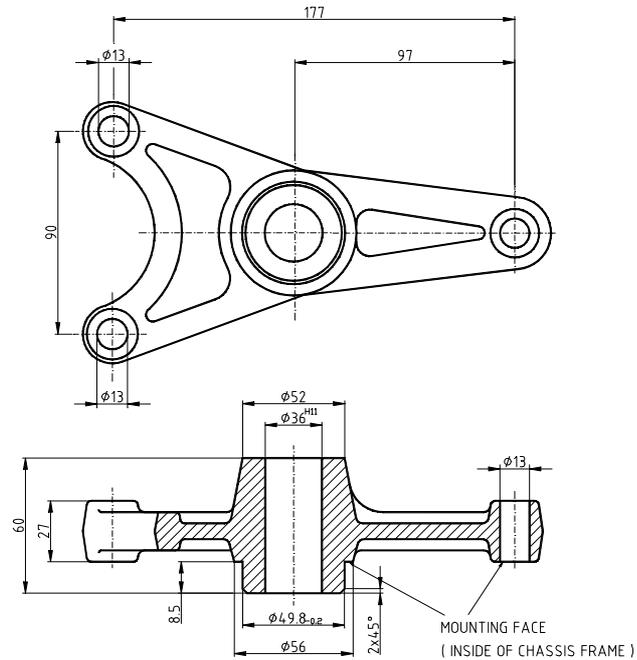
Center mounting support parts number: A 424 551 07 21
